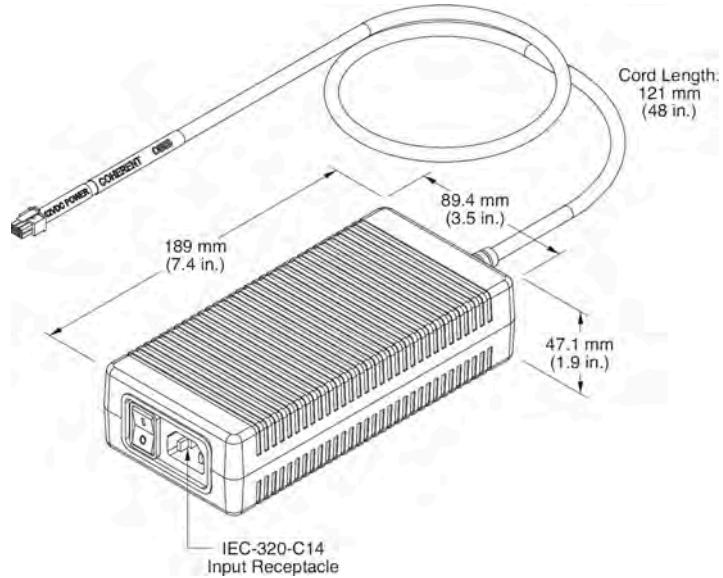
OBIS 6-Laser Remote Power Supply Dimensions
